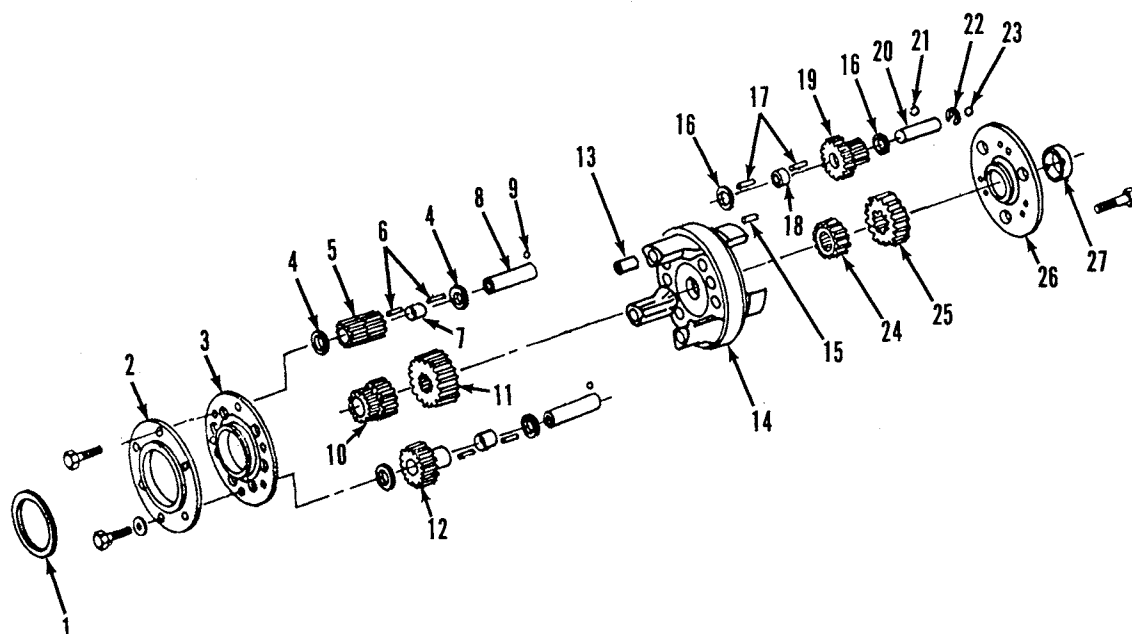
Exploded view of output planetary carrier used on 4050 and 4250 Power Shift models.
